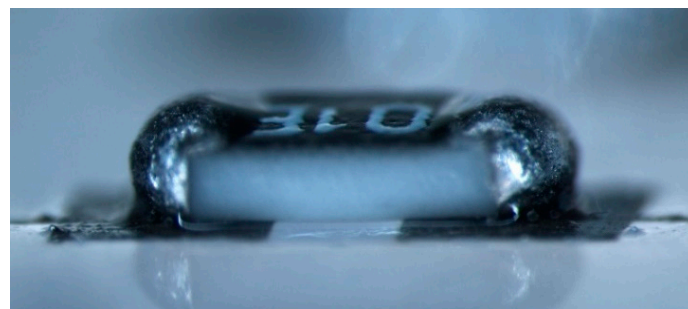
Aerosol jet printed Ag structures with LAB 2271 ink after soldering with SnBi solder at 180 °C.
